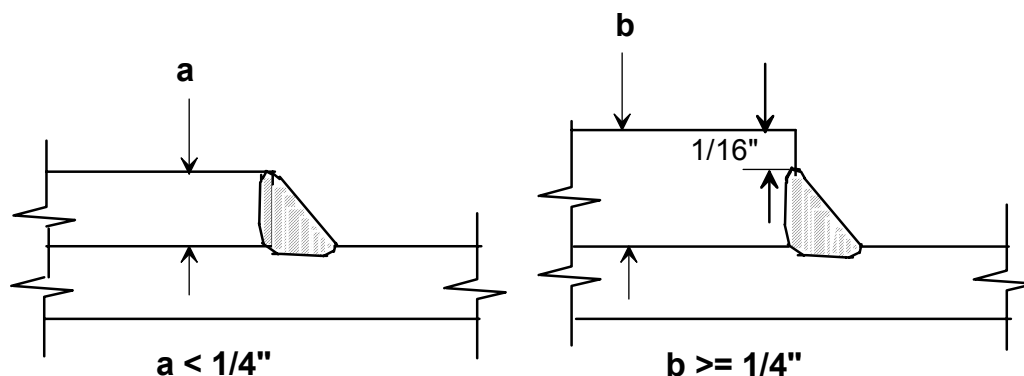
Maximum Fillet Weld Sizes
